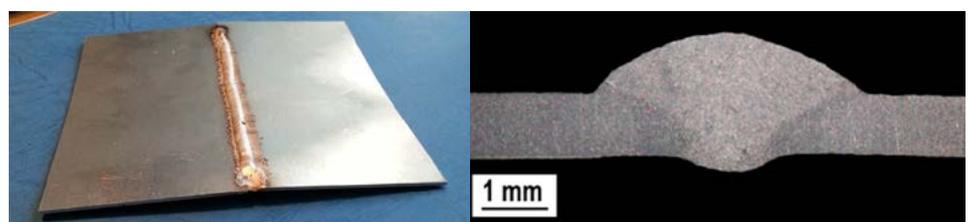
Welded joint and macrostructure – fixing variant no.1, welding parameters – Table 2
